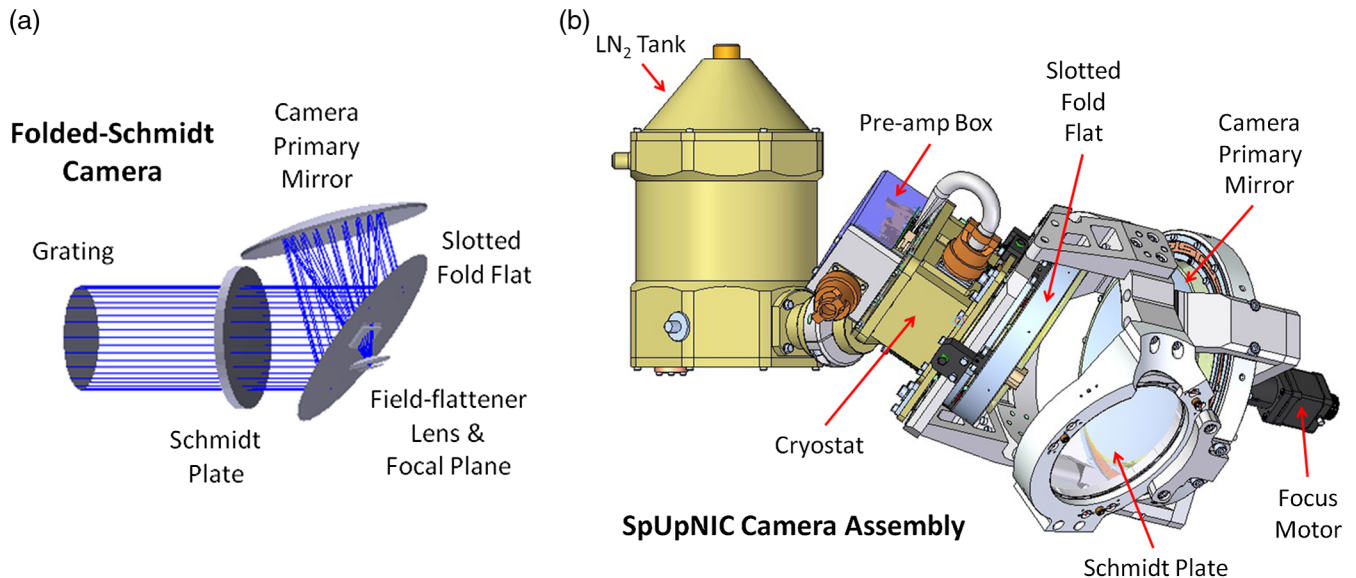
(a) Optical layout of the SpUpNIC camera and (b) the CAD model for the new camera assembly.
